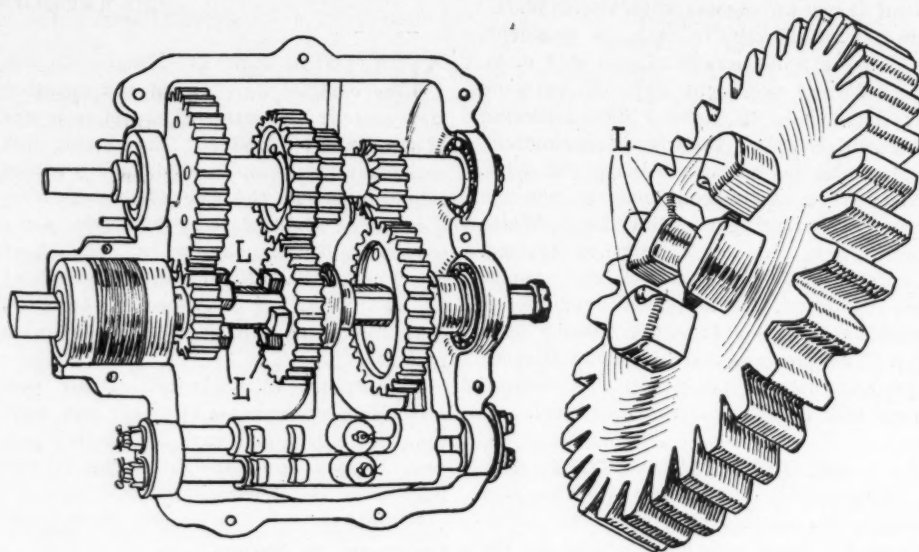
Typical sliding gearset and dog clutch on driven gear
